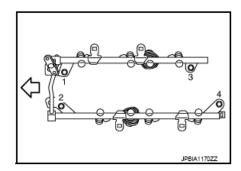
Fuel Tube And Fuel Injector Assembly Mounting Bolt Tightening Sequence Courtesy of NISSAN NORTH AMERICA, INC.
